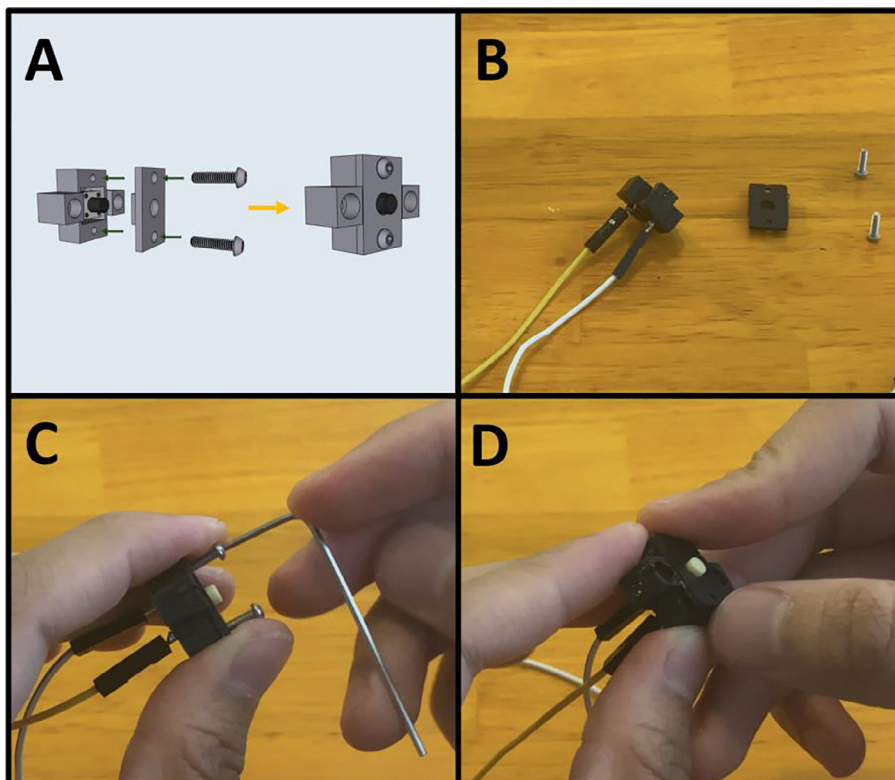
a-d: The procedure for finishing the Purge Button Assembly.
